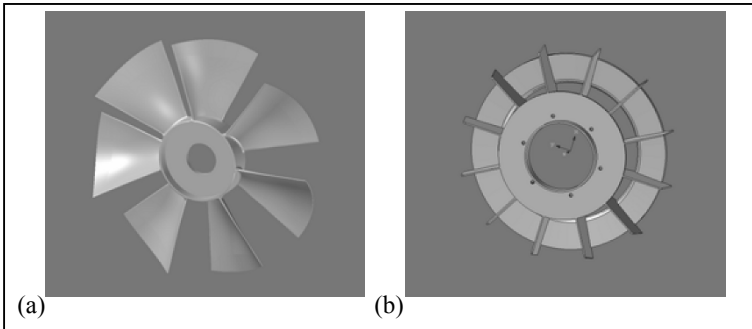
CAD representation of cooling fans generated using reverse engineering techniques for (a) axial fan and (b) radial fan.
